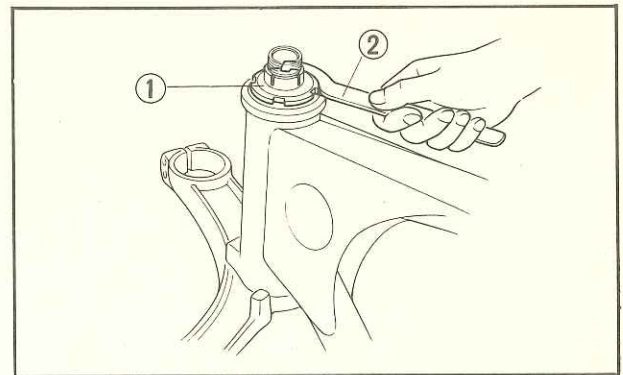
(1) Steering head top thread (2) 46 mm pin wrench
